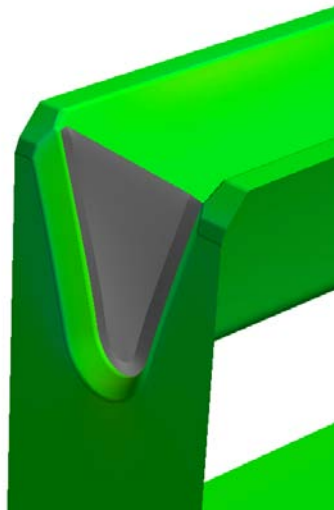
Bell 139-tooth helical gear with blocked leading edge.
